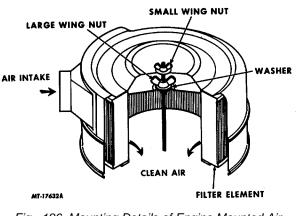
Mounting Details of Engine Mounted Air Cleaner
